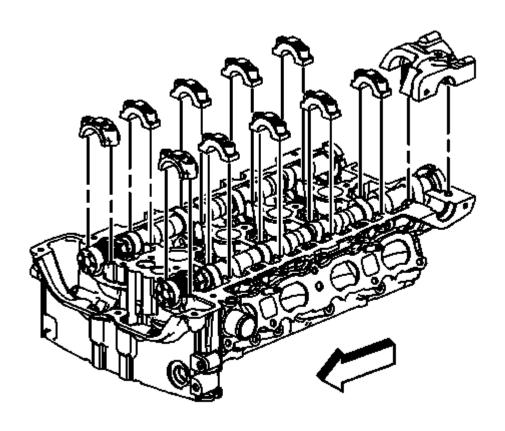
Exhaust/Intake Camshaft And Caps Courtesy of GENERAL MOTORS COMPANY
